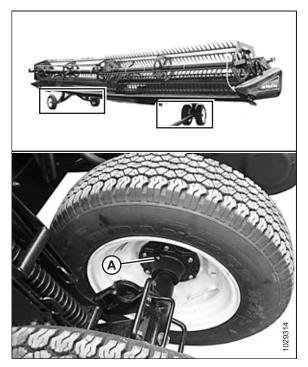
Every 500 Hours A - Wheel Bearings (Four Places)
